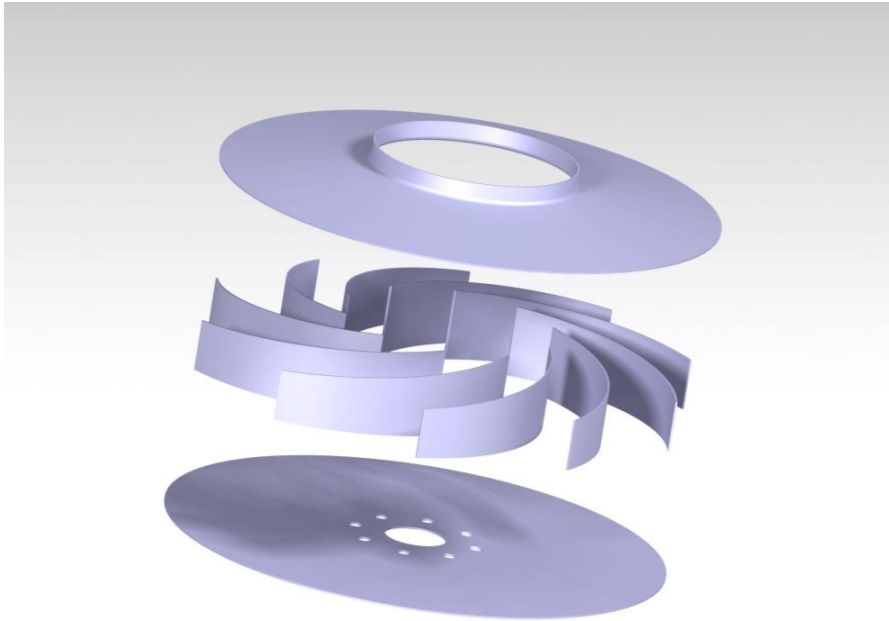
Exploded view of the centrifugal impeller. The back plate, the blades and the shroud were welded together forming the blower assembly.
